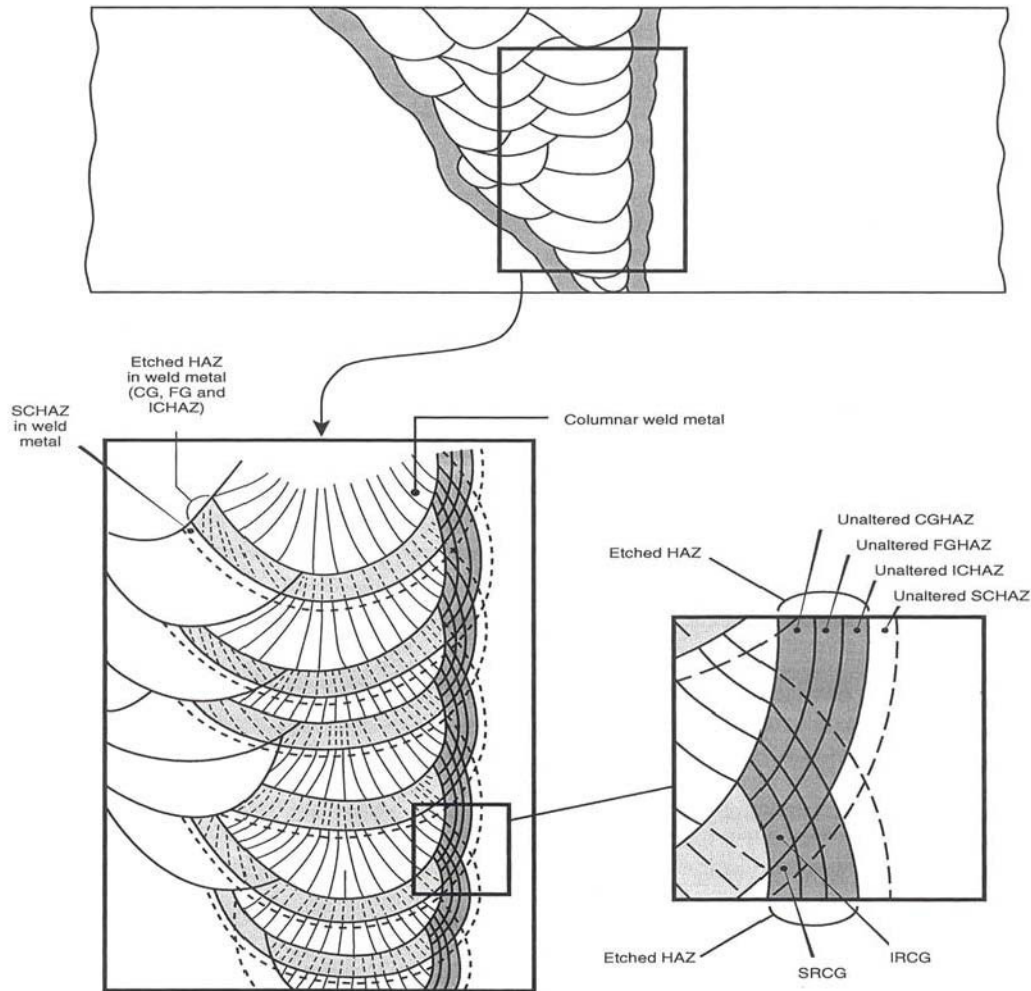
HAZ Regions in a Multi-Pass Weld With One Plate Edge Unbeveled
